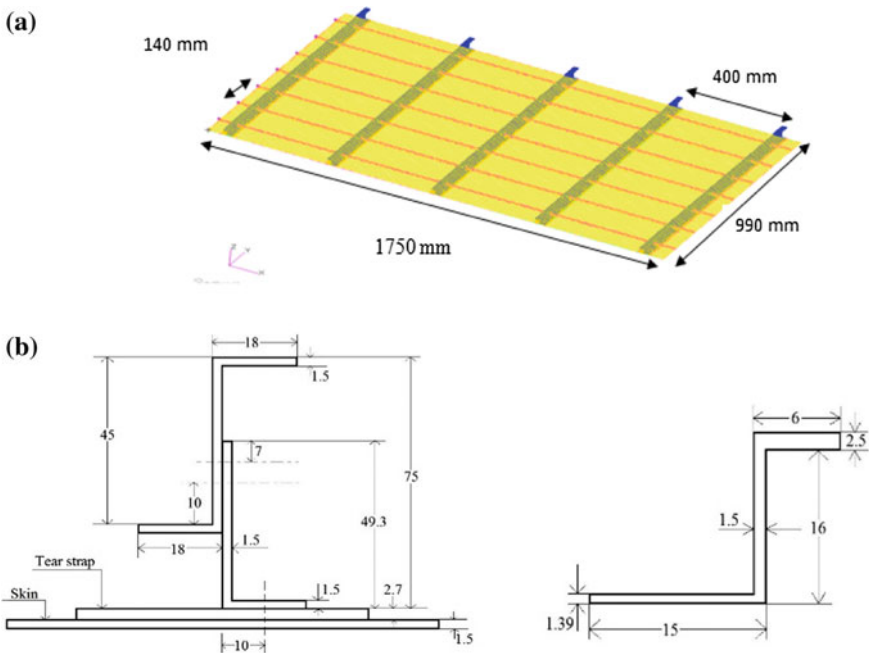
a Flat stiffened panel, b details of bulkhead and stiffener
